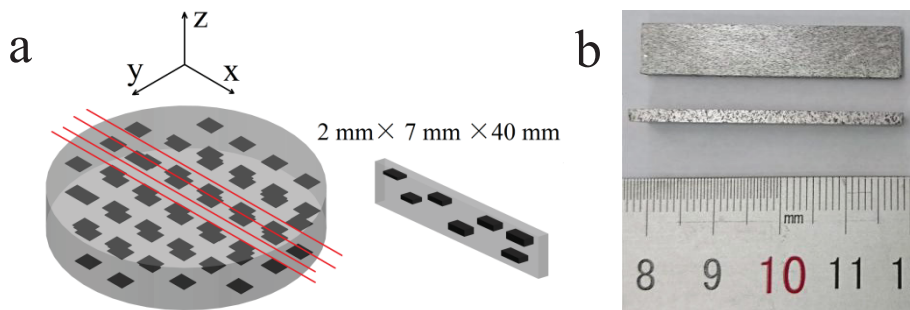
(a) Schematic illustration of sectioning the as-sintered sample for bending test and (b) photograph of the final bending test samples.
